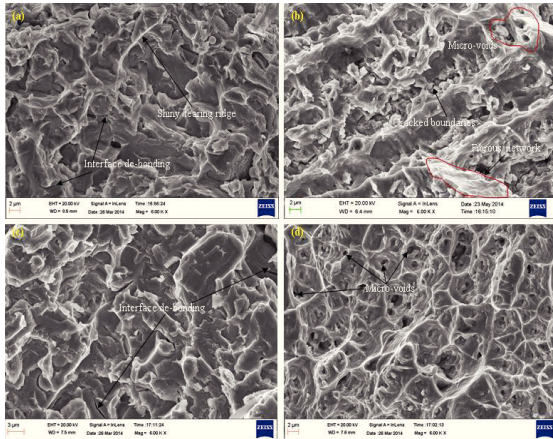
SEM fractograph of tensile tested samples showing CCGTA weldment employing (a) ER2553 (b) ERNiCrMo-4; PCGTA weldment employing (c) ER2553 (d) ERNiCrMo-4 filler respectively.
